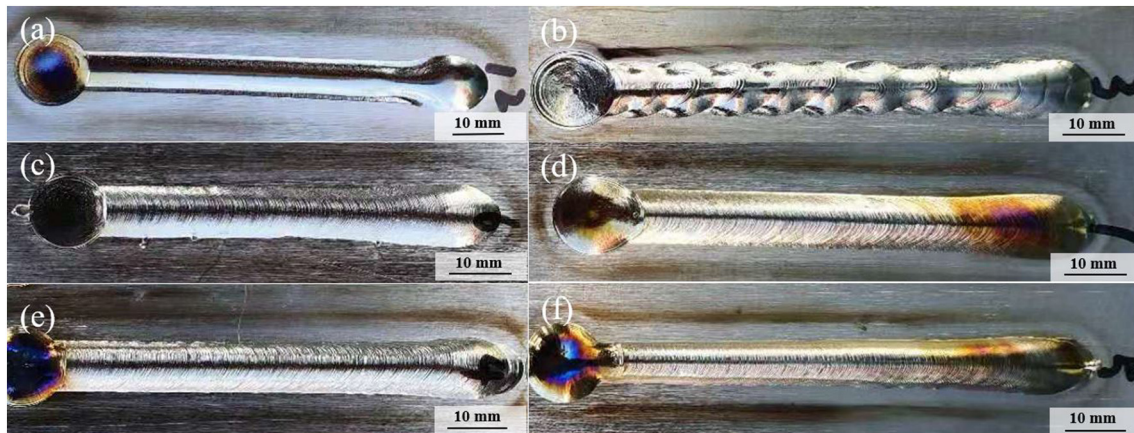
Bead surface profiles with different WFS: (a) 0 m/min; (b) 1 m/min; (c) 2 m/min; (d) 3 m/min; (e) 4 m/min; (f) 5 m/min.
